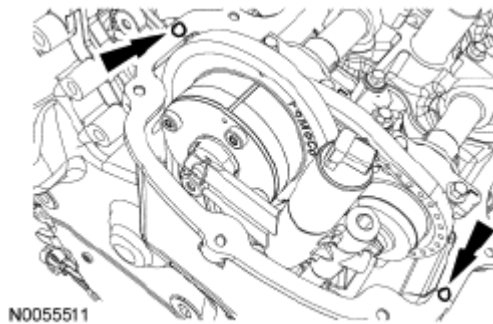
Identifying Engine RTV Silicone Applying Area To Cylinder Head Joints
